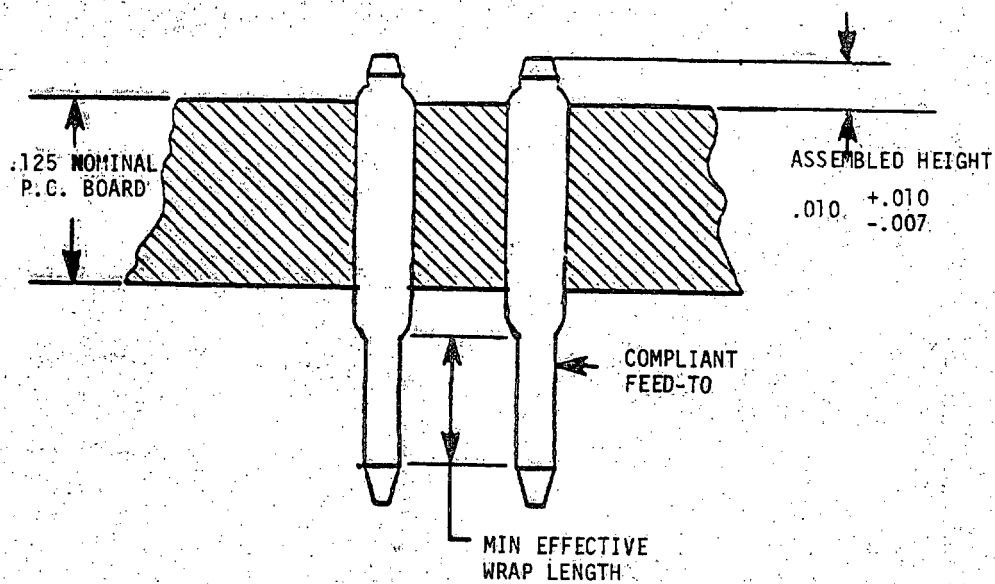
Cross-sectional view of printed-wiring electrical backplane assembly. - Continued
